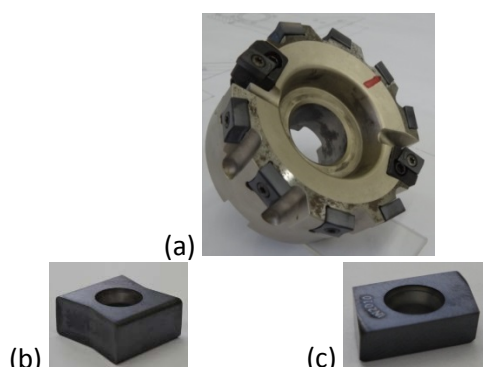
(a) Face milling cutter, (b) Rough insert NNE324-100, (c) Straighteners insert YDA323L101.
